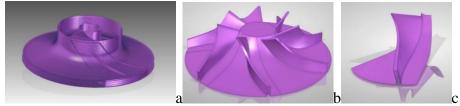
CCAE 9-125 centrifugal compressor rotor: a) rotor – CAD design; b) 17-4PH metallic rotor; c) rotor assembly stage I – CAD design
